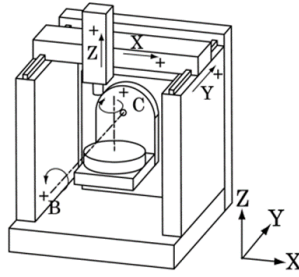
CNC 5 axis CNC Machine DMG 50U Axis System [6].
